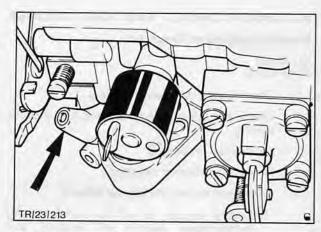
Tamper proof plug fully installed Note: Plug flush with housing
